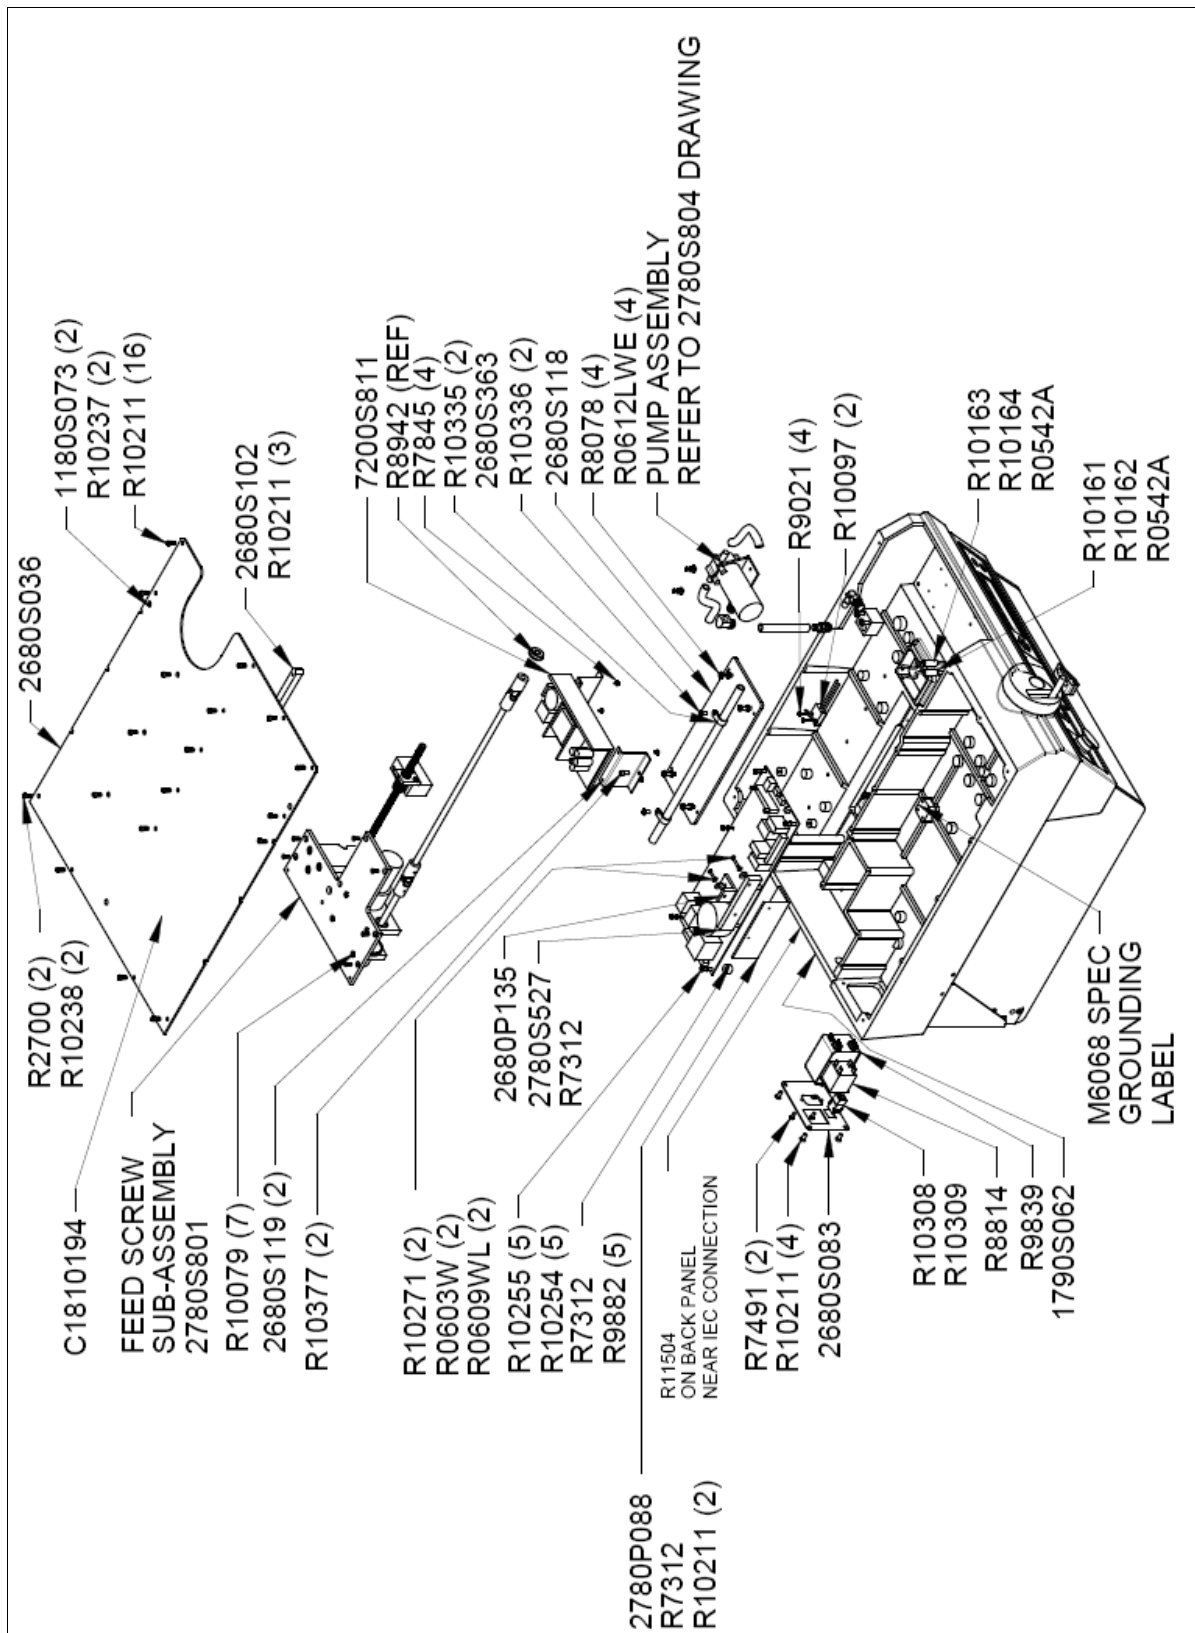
Bottom View of IsoMet 5000 Assembly Diagram (2780900C)
